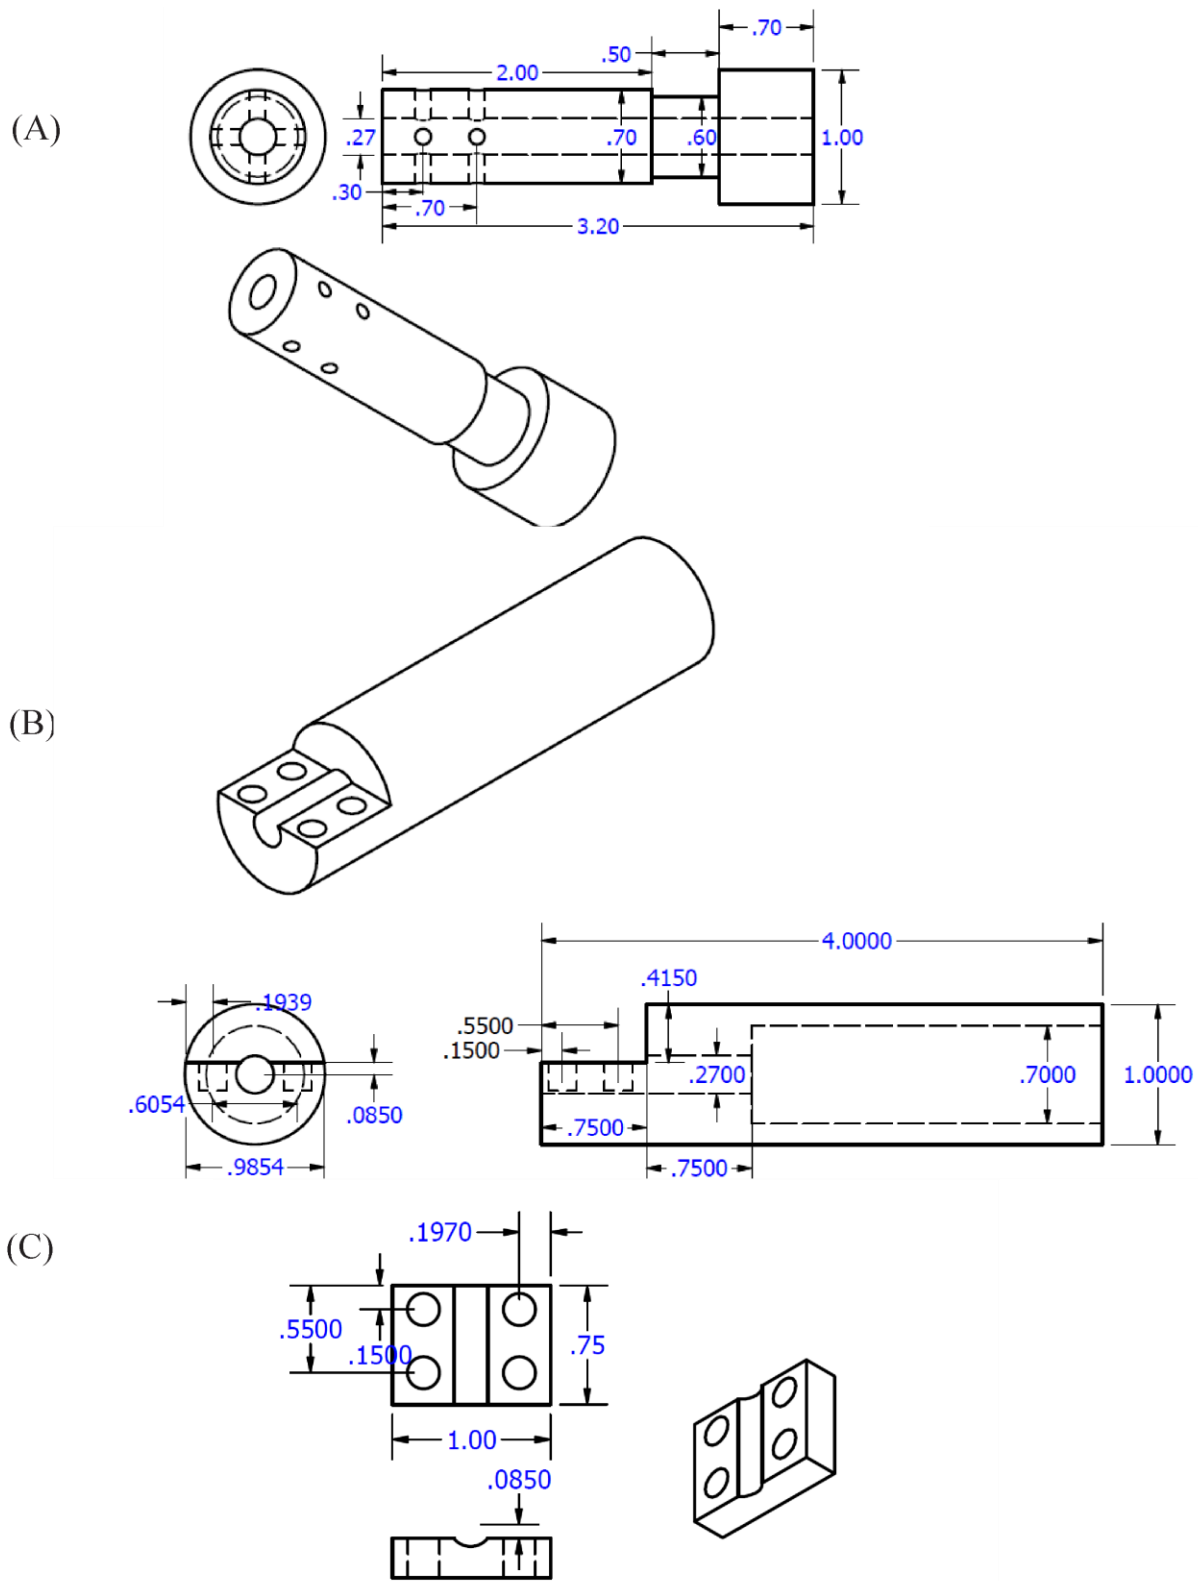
(A) water tank top, bottom is welded to the water flowing outer tube, top attached to the Ta shield, (B)welding adapter, top welded the 2.75" flange and bottom is welded to the minflange.
